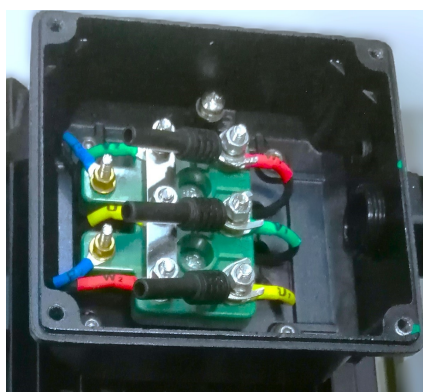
Cable shoes mounted onto each phase in the AC machine
